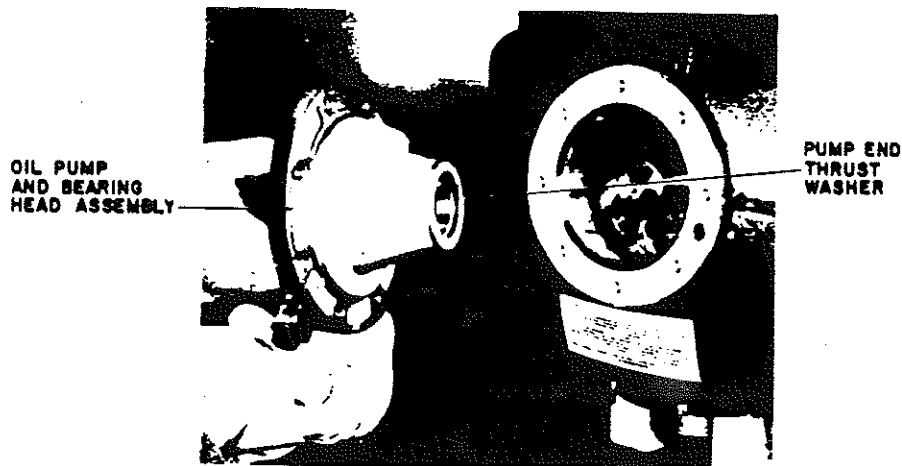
Oil Pump and Bearing Head Assembly and Thrust Washer Removal
